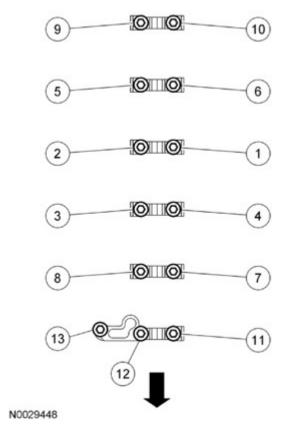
Removing/Installing Bearing Caps And Camshaft Courtesy of FORD MOTOR CO.
